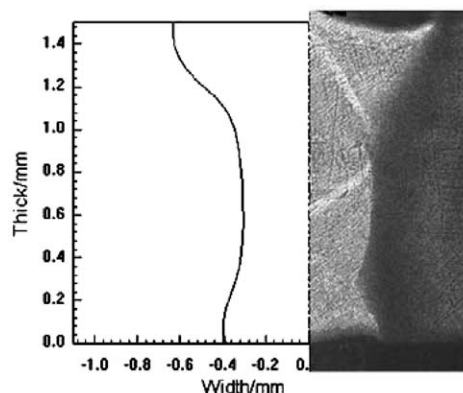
Comparison of weld formation in laser beam welding determined experimentally with that by calculation.
